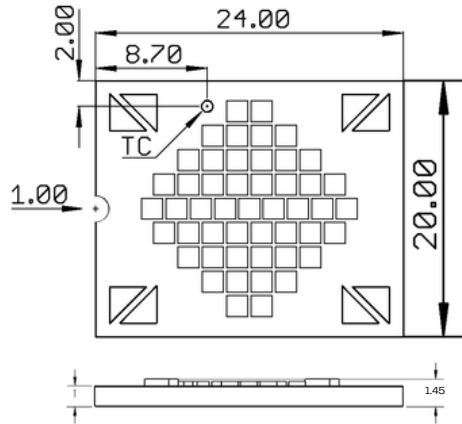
L502A-RGBxxxY Mechanical Drawing
